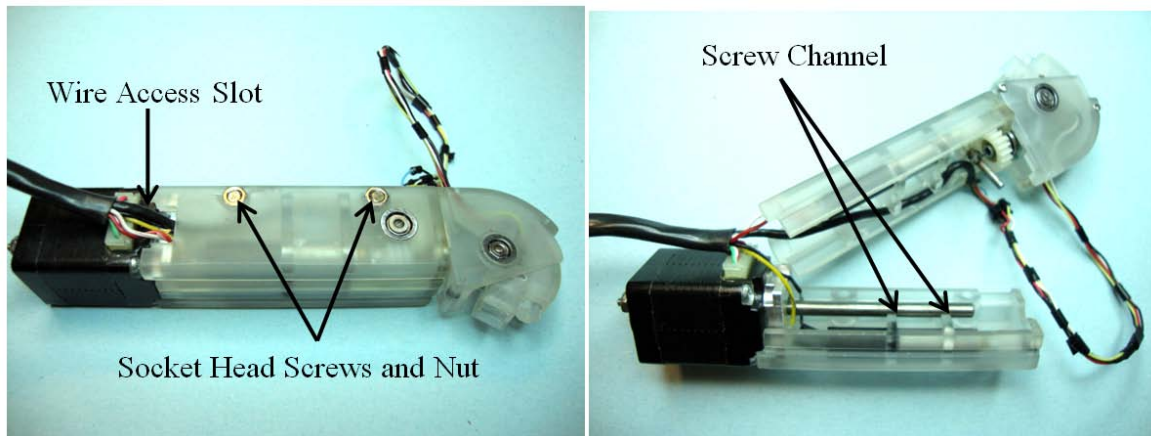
SILS Magnet Camera linear actuator mounting bracket.
